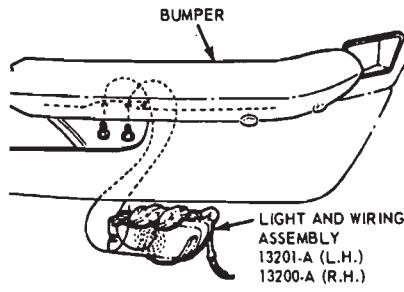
Maverick Front Parking and Turn Signal Light Installation
